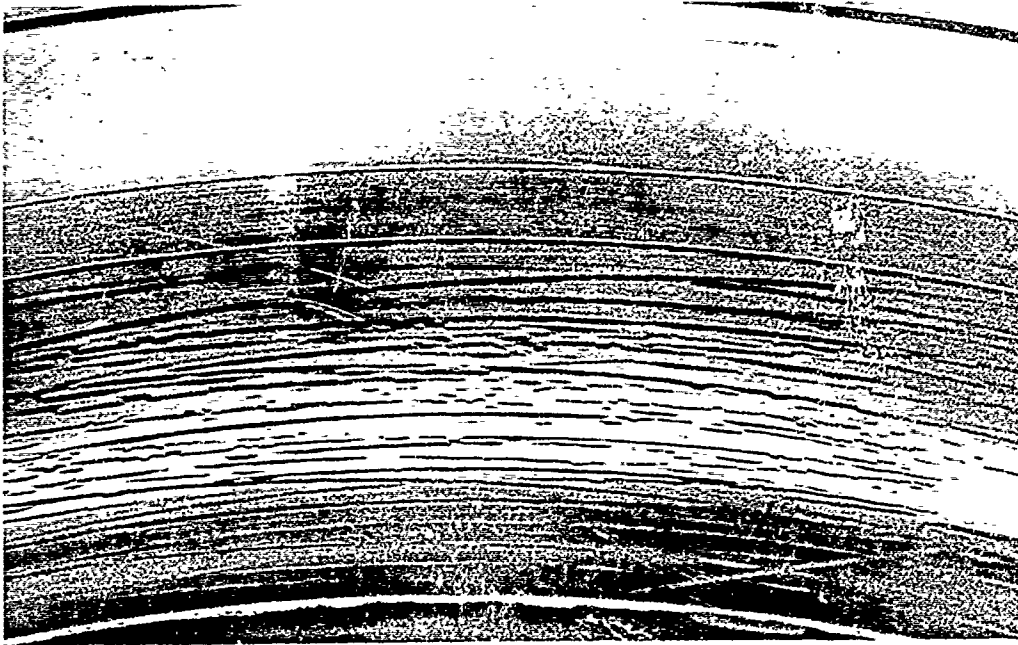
Same window as in Figure 39; note that the circumferential crazing on the bearing surface of the flange appears primarily near the heel of the flange and not the O-ring groove.
